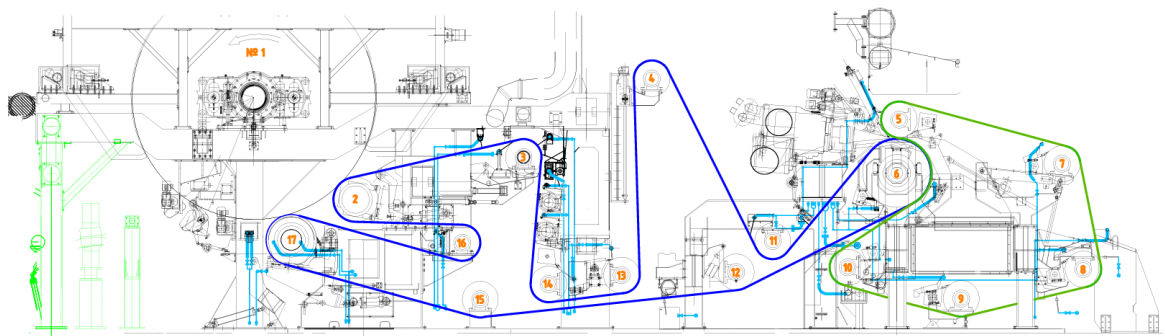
Paper machine TS view (see a copy at appendix A)^[1].
